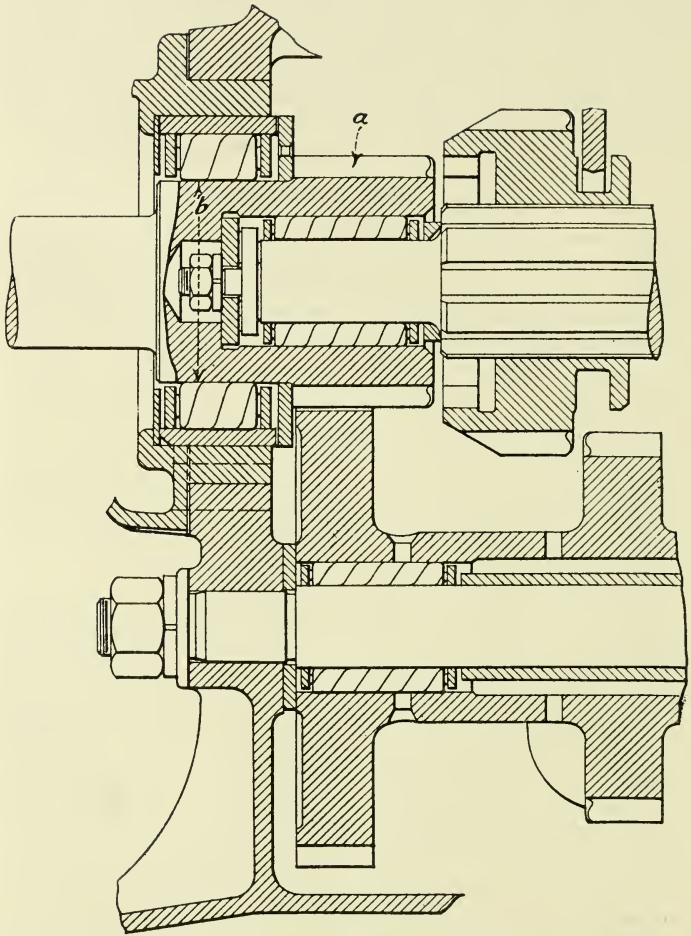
FRONT END OF A TYPICAL TRANSMISSION SHOWING HOW THE MAIN DRIVE GEAR IS CARRIED ON A ROLLER BEARING
